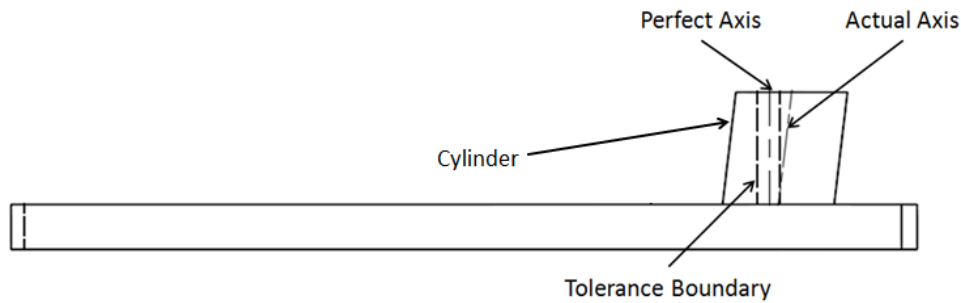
The boundary zone for the true position tolerance.
